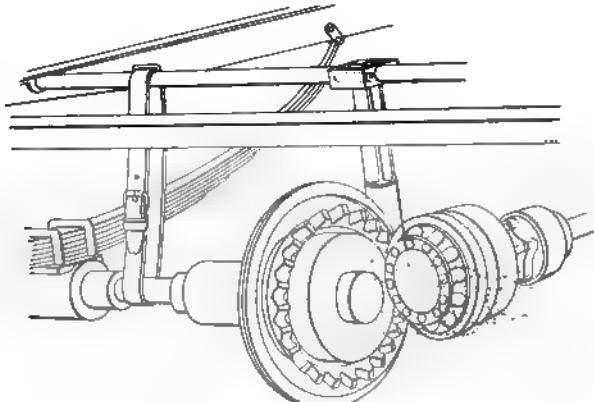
The Haynes-Propeller-Shaft Drive, which marks a decided improvement on common types of bevel drive.
